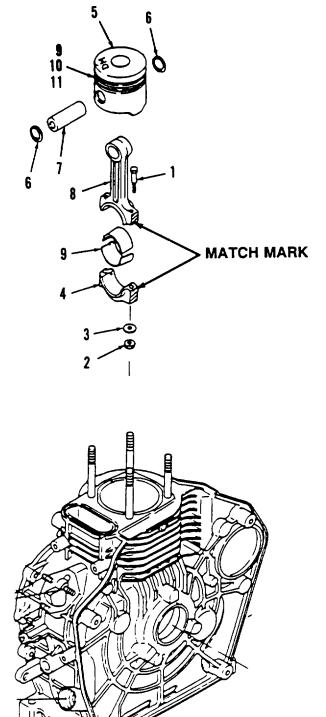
Piston and Connecting Rod Assembly Replacement.
